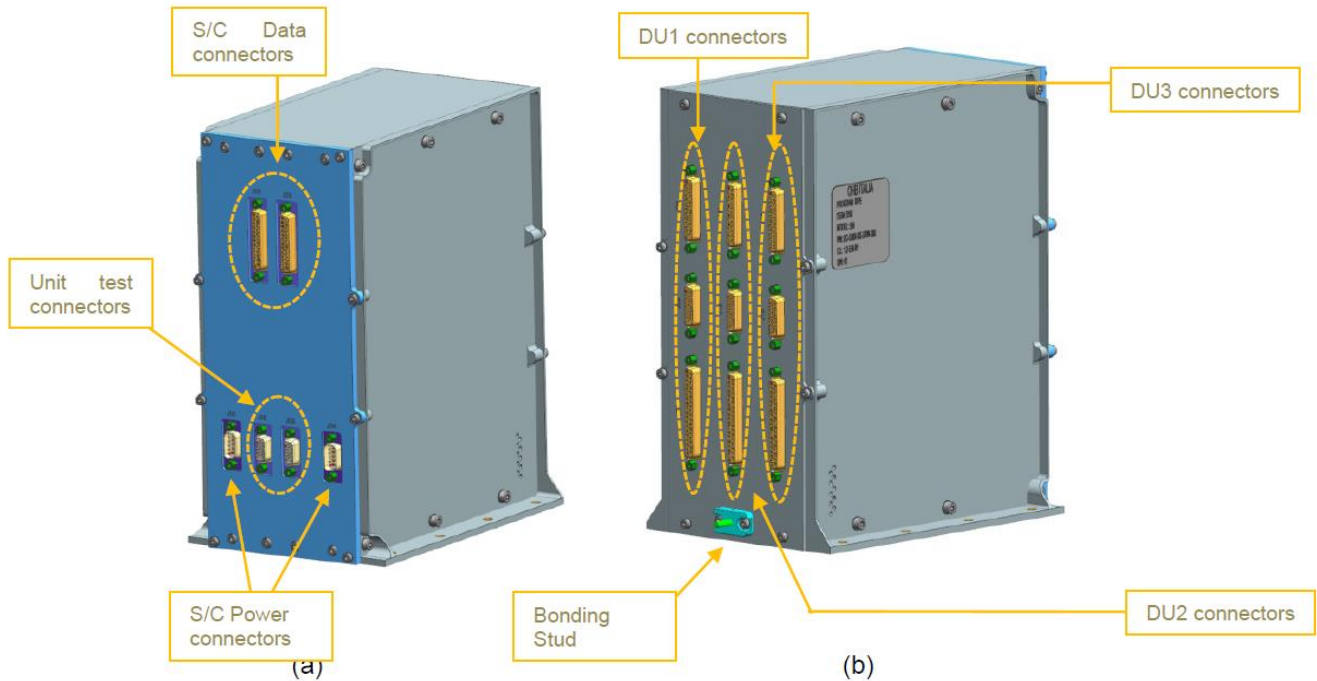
DSU PFM mechanical box: front (a) and rear (b) view
